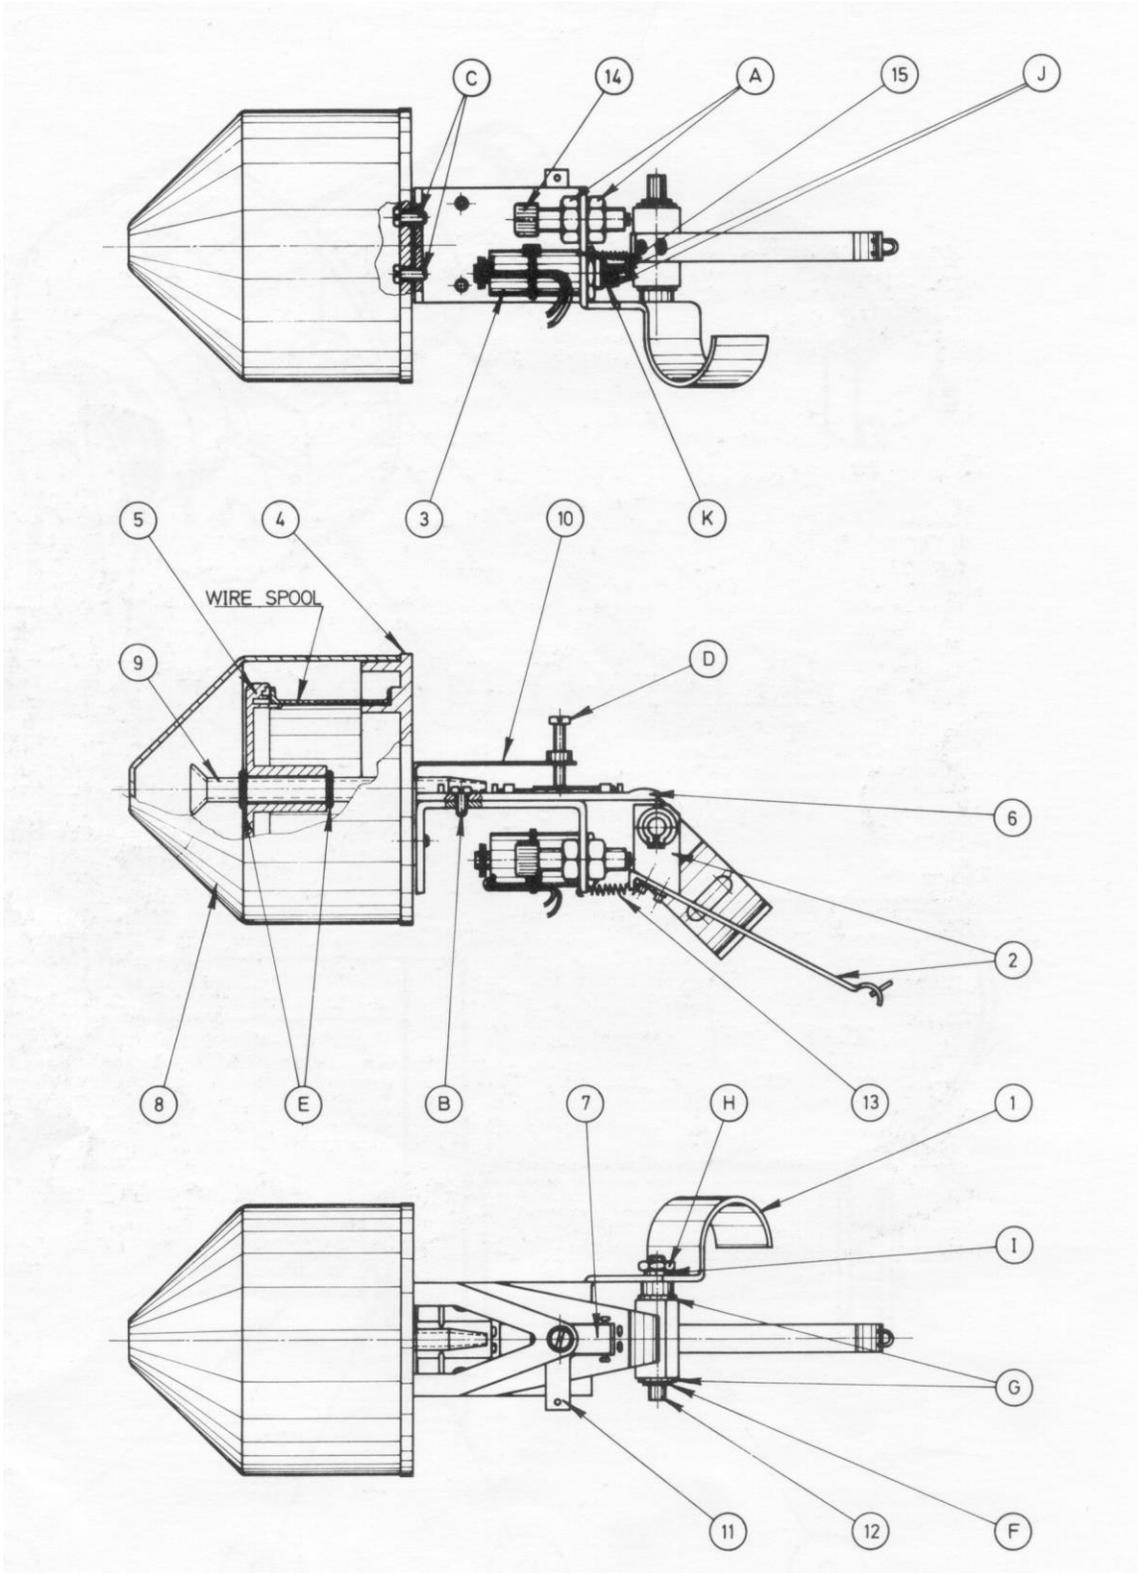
SPOOL HOLDER ASSEMBLY (#4124-0460-0)
